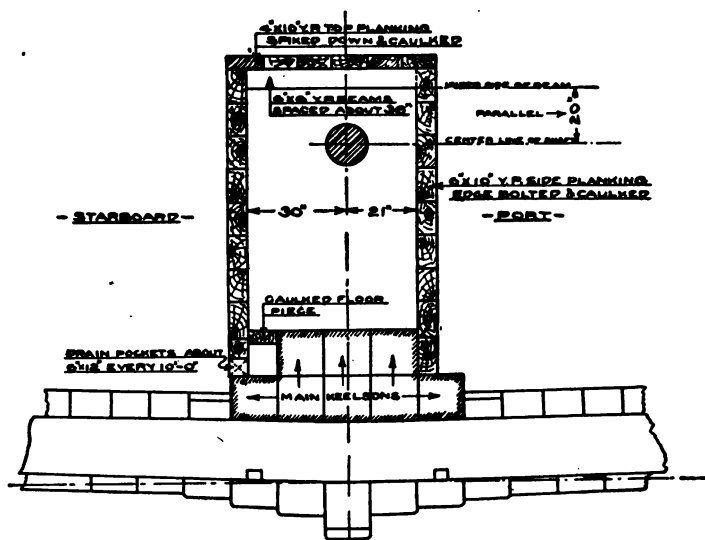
Section Through Shaft Tunnel, Looking Aft.
